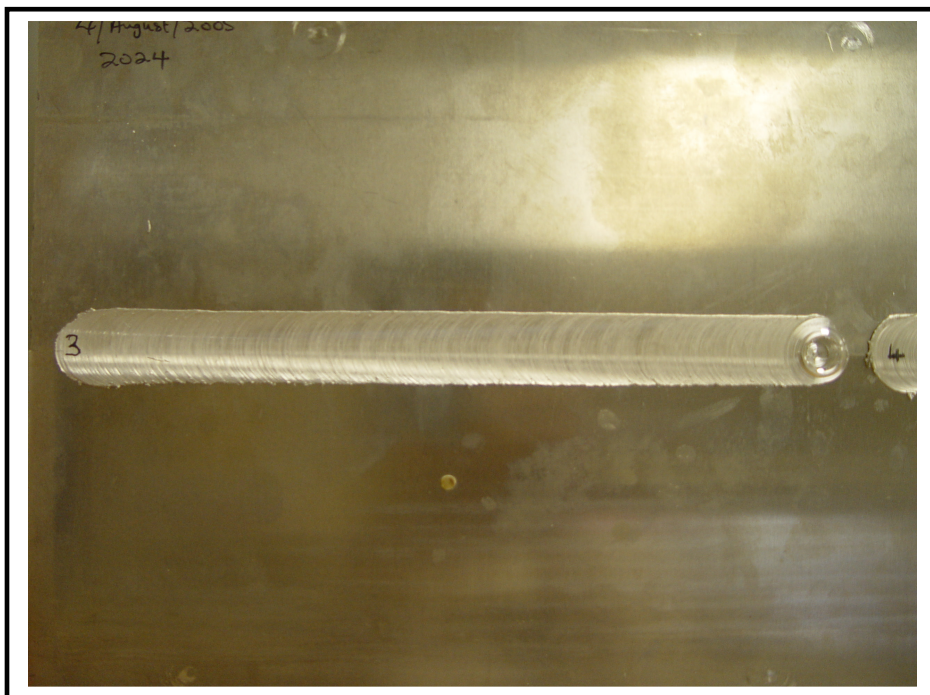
FSW-weld (2024 alloy and Tool 2).
